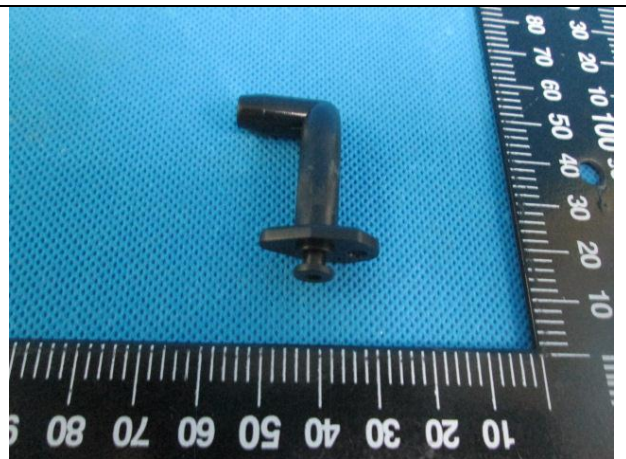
, Valve seat / Valve core / Heater bush / Lower driller / Capsule holder / Ejector ring
